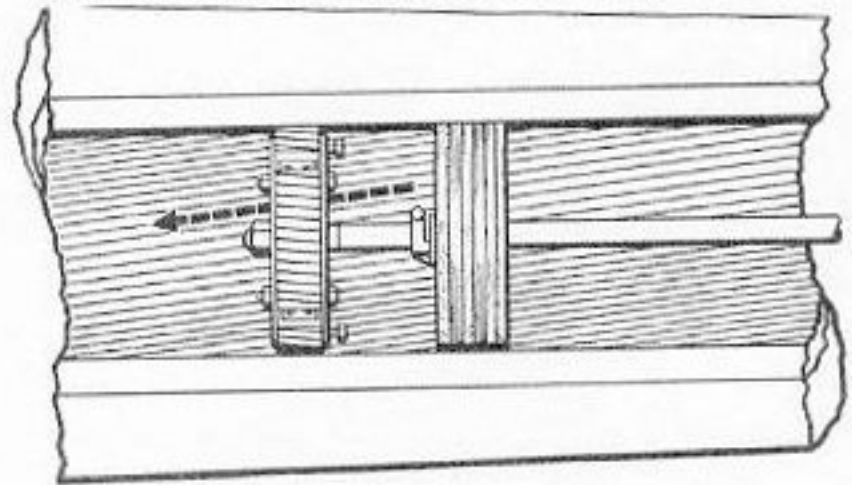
Use of Bore Lapping Head in the Care and Preservation of Gun Assemblies
